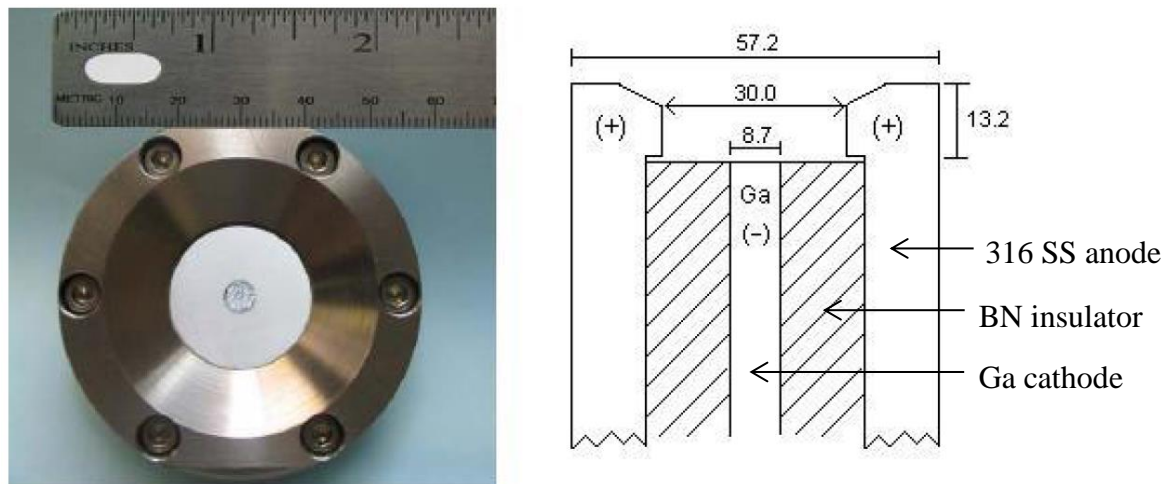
(a) Top view of thruster. (b) Cross sectional view (dimensions in mm) [6].
